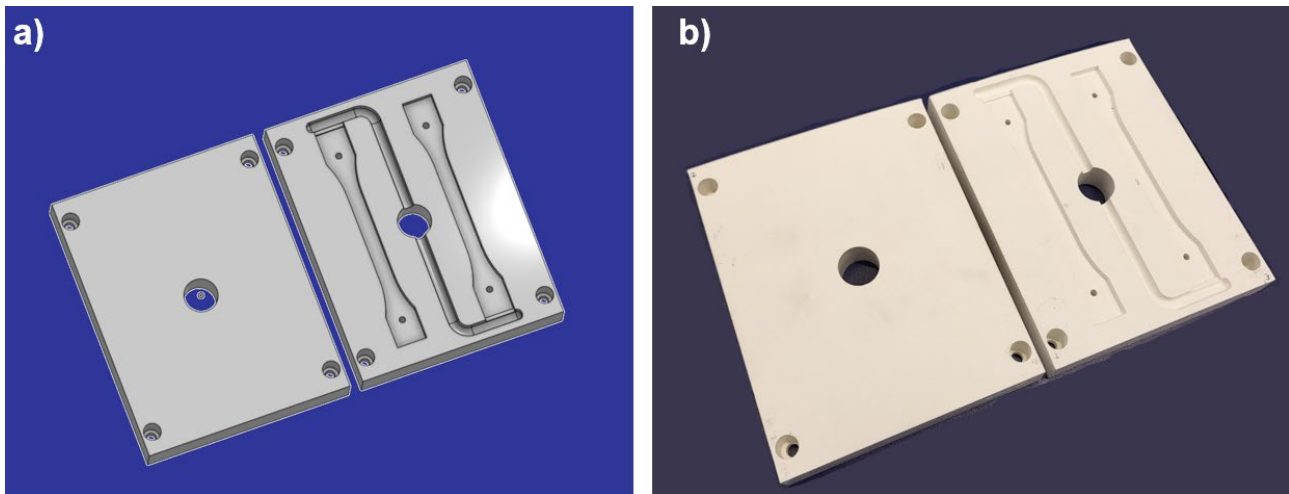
Tool inserts for injection molding: a) CAD model of counter plate (left) and tool plate (right) and b) additively manufactured tool set from the developed composite material using mSLA.
